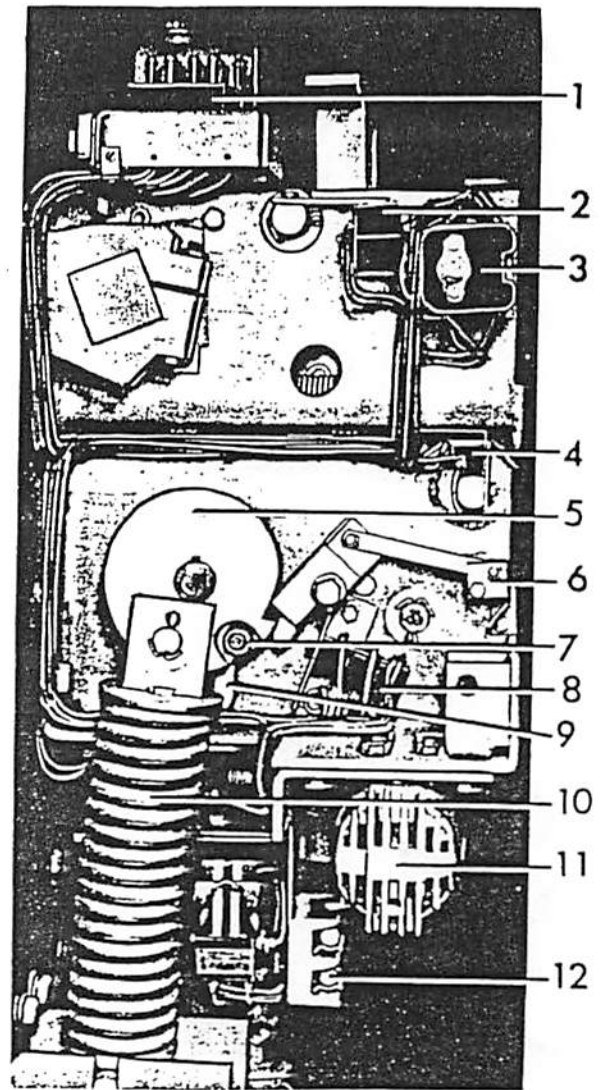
(8034473) Left Side View ML-13 Operating Mechanism
